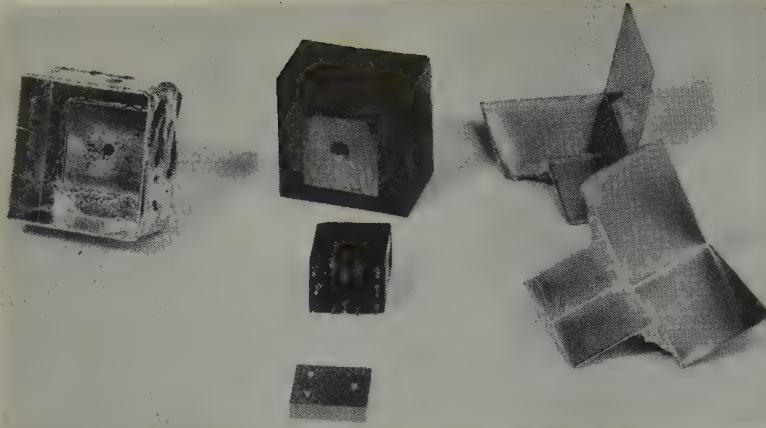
, left to right: assembled mold; disassembled cured unit; and removed eutectic mold. Notice the absence of flash on the encapsulated component.
